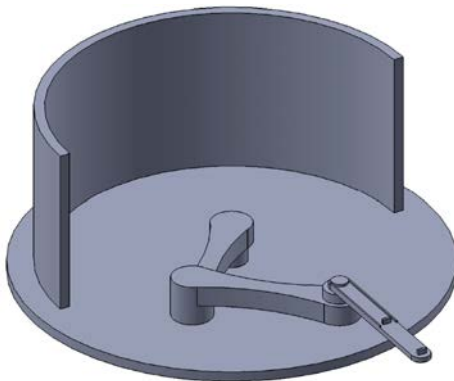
Schematic view of the inside of the LoadLock chamber, showing the robot used to move the samples.
